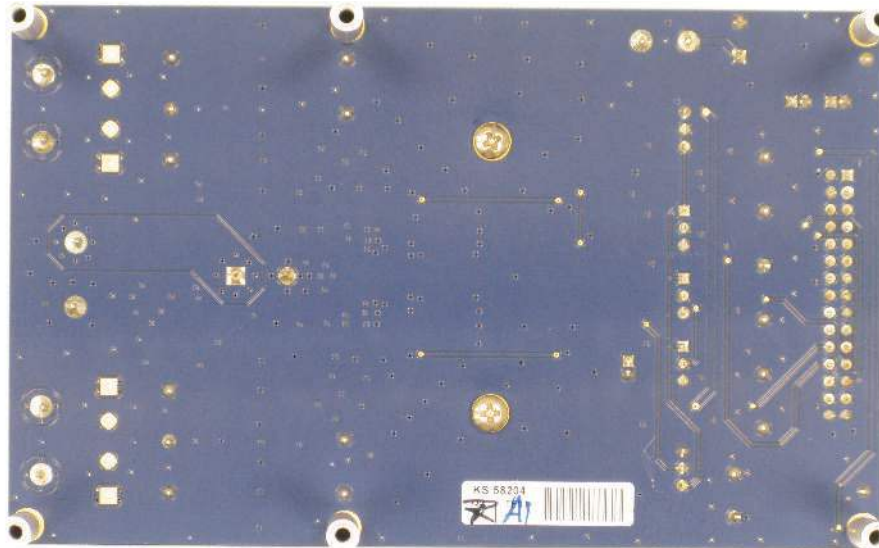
The TI DRV8432EVM Motor Drive Evaluation Board – Bottom View
